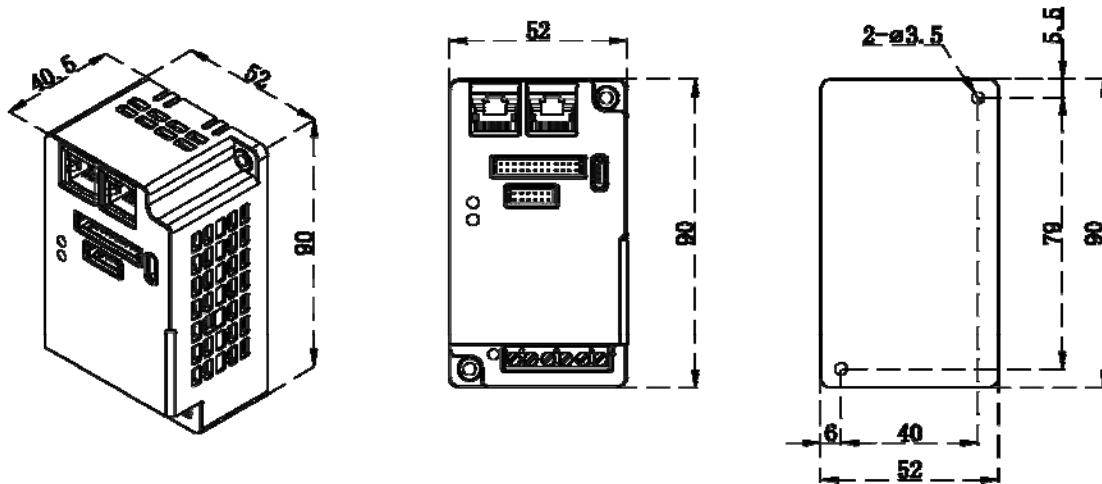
Outline dimensional drawing of Type B driver
